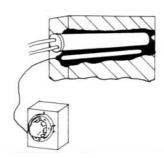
Cartridge heater and thermostat bulb inserted into machined holes.
